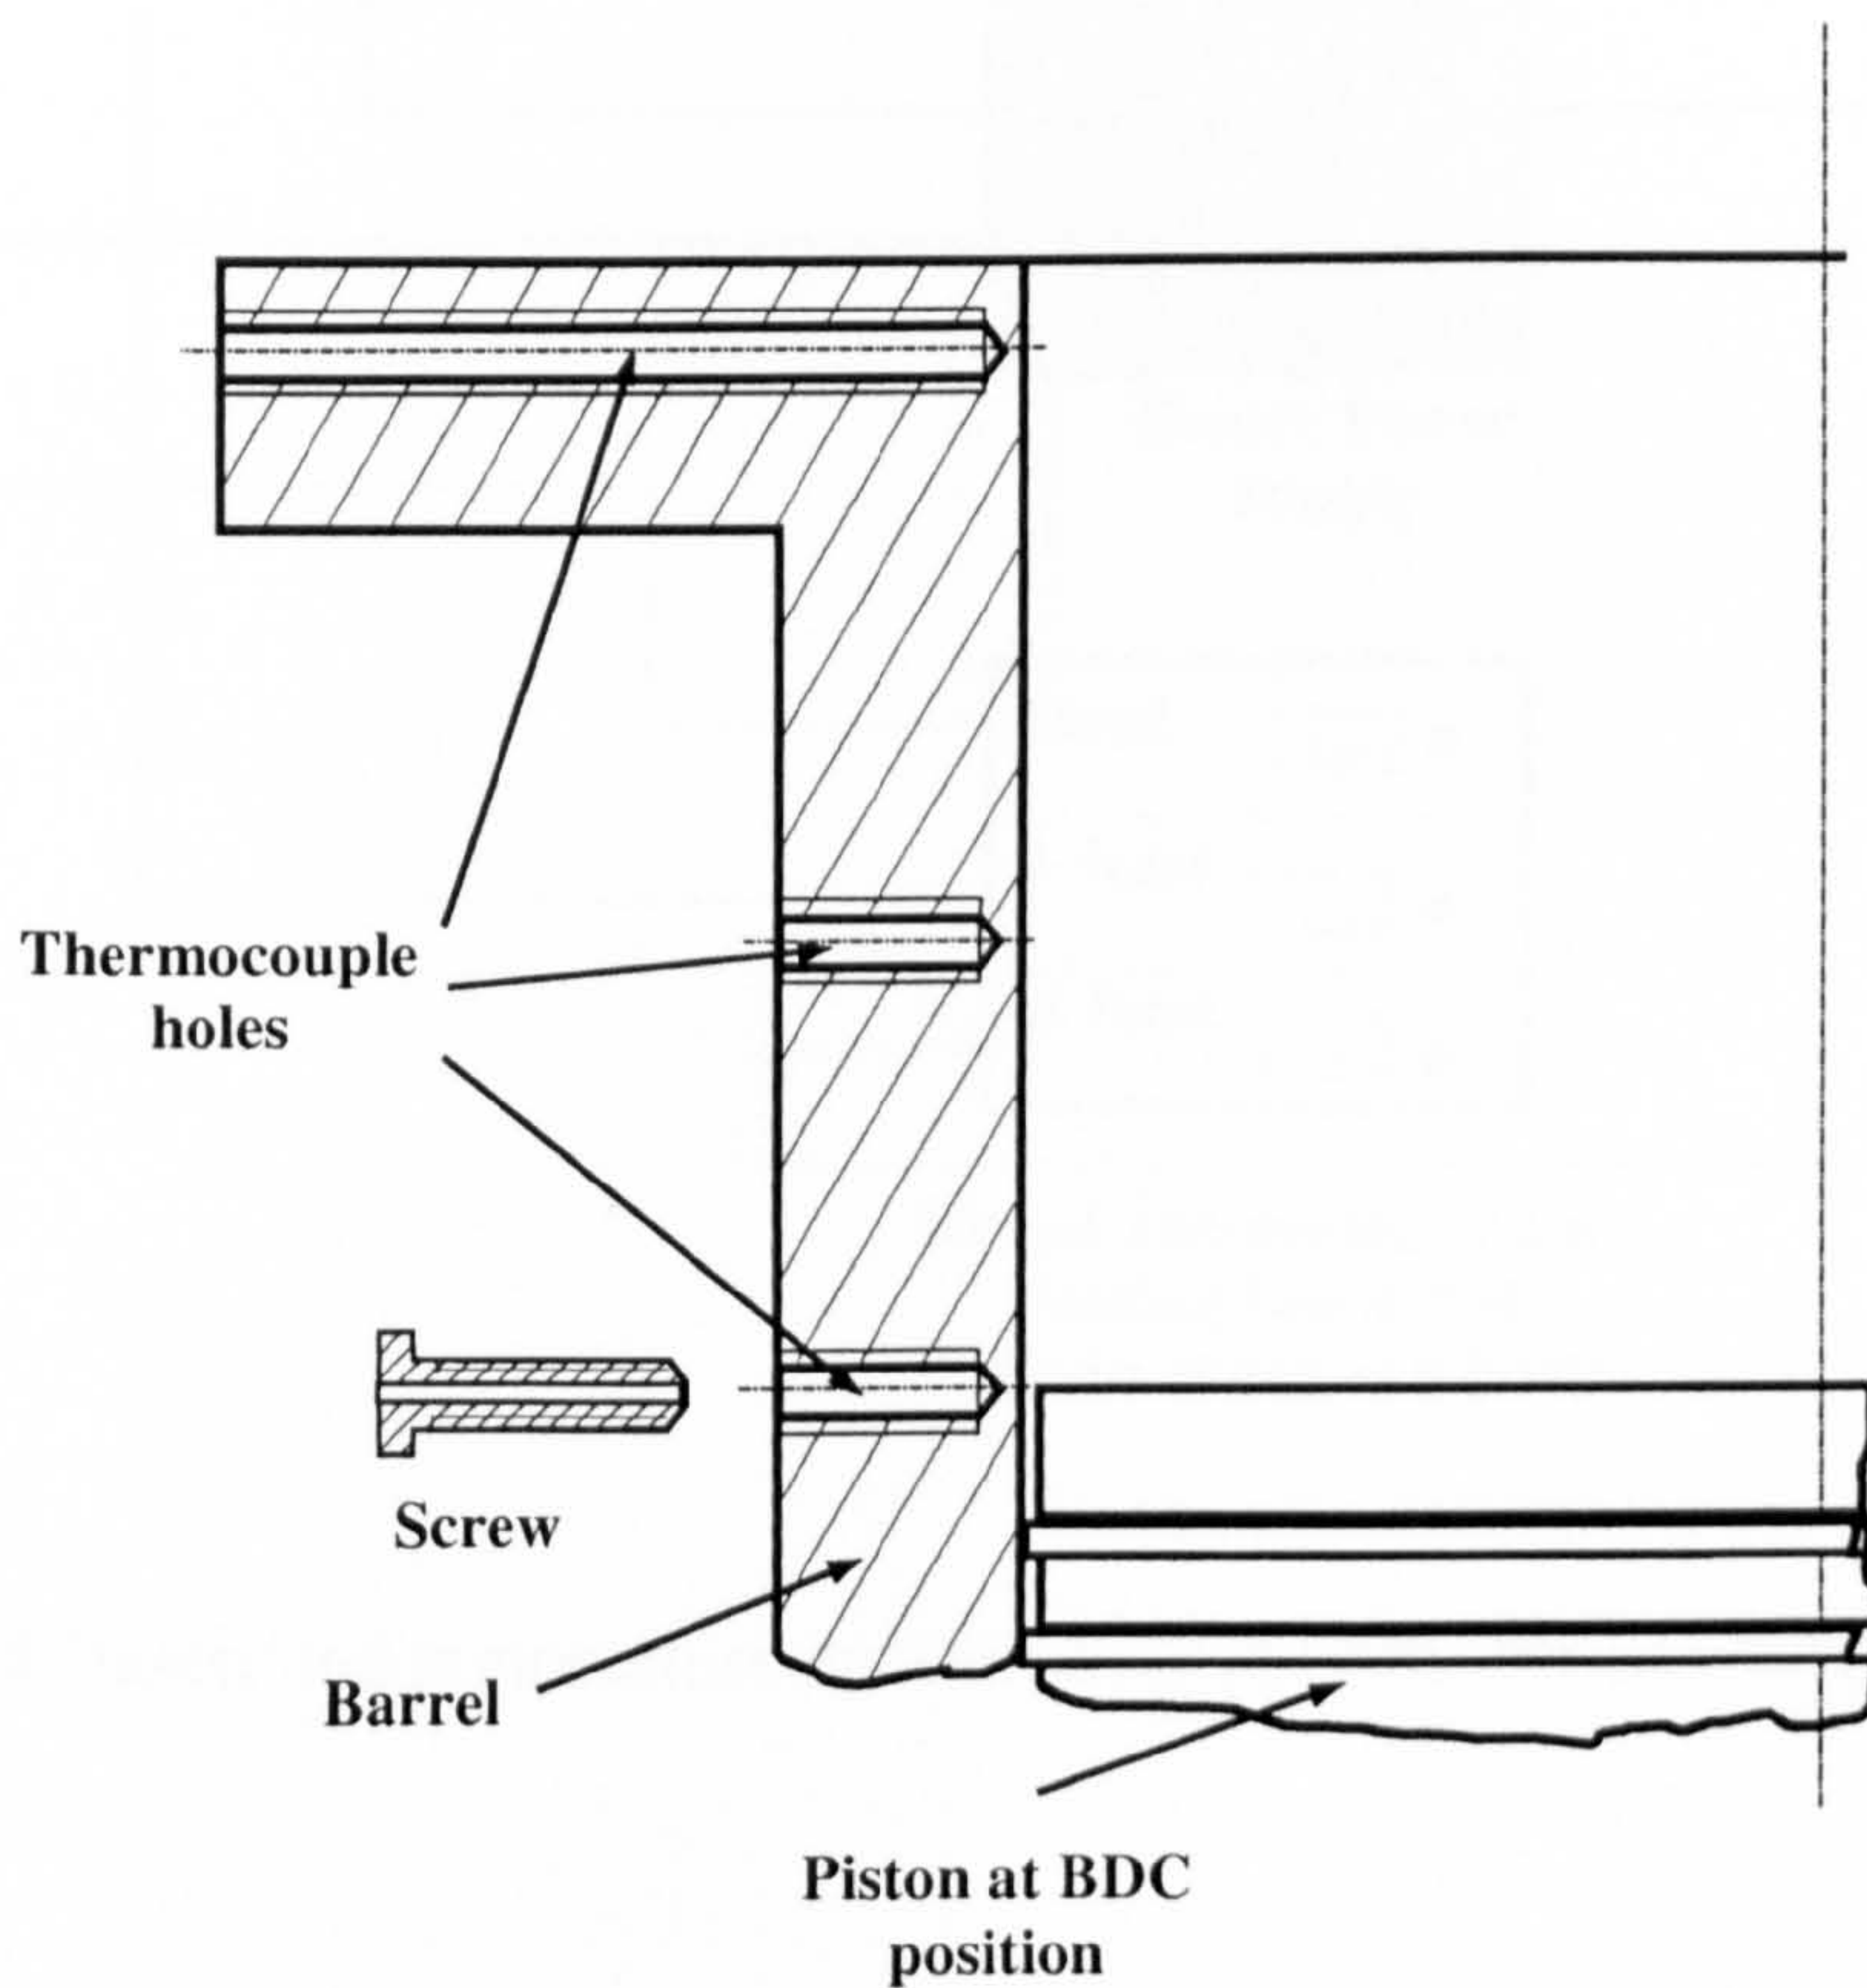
The position of thermocouple holes on cylinder and a typical holder screw.
